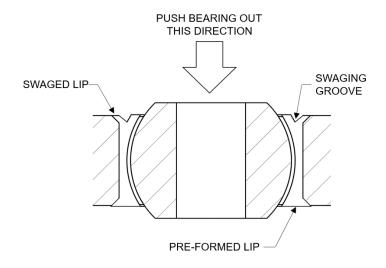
Blade Oriented with Preformed Lip Facing Down for Bearing Removal
